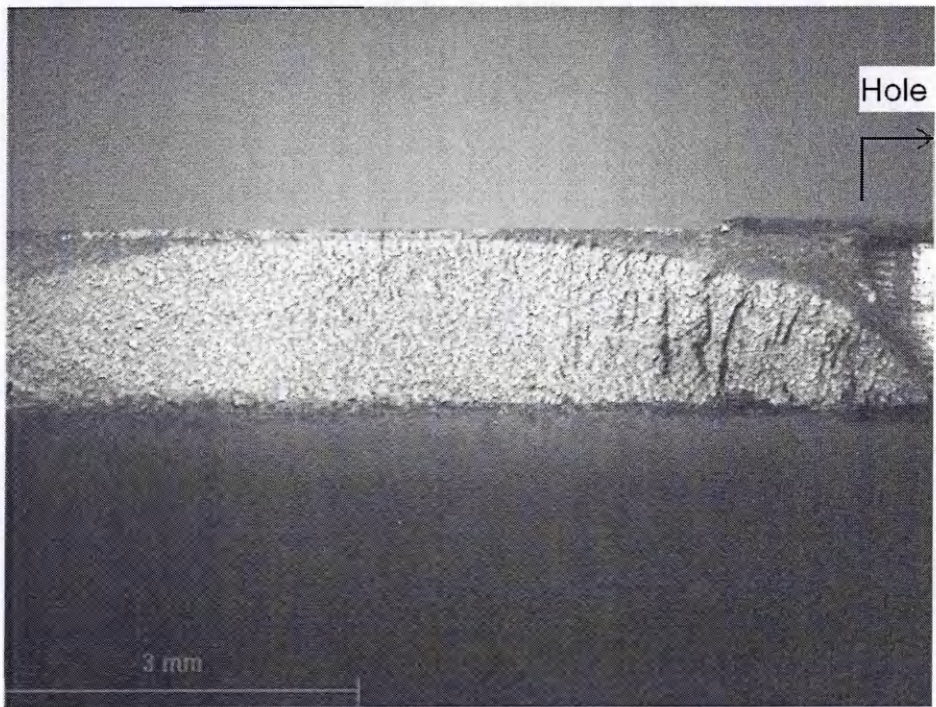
Front fracture surface from testing configuration 3 (Table 6.1.1)
